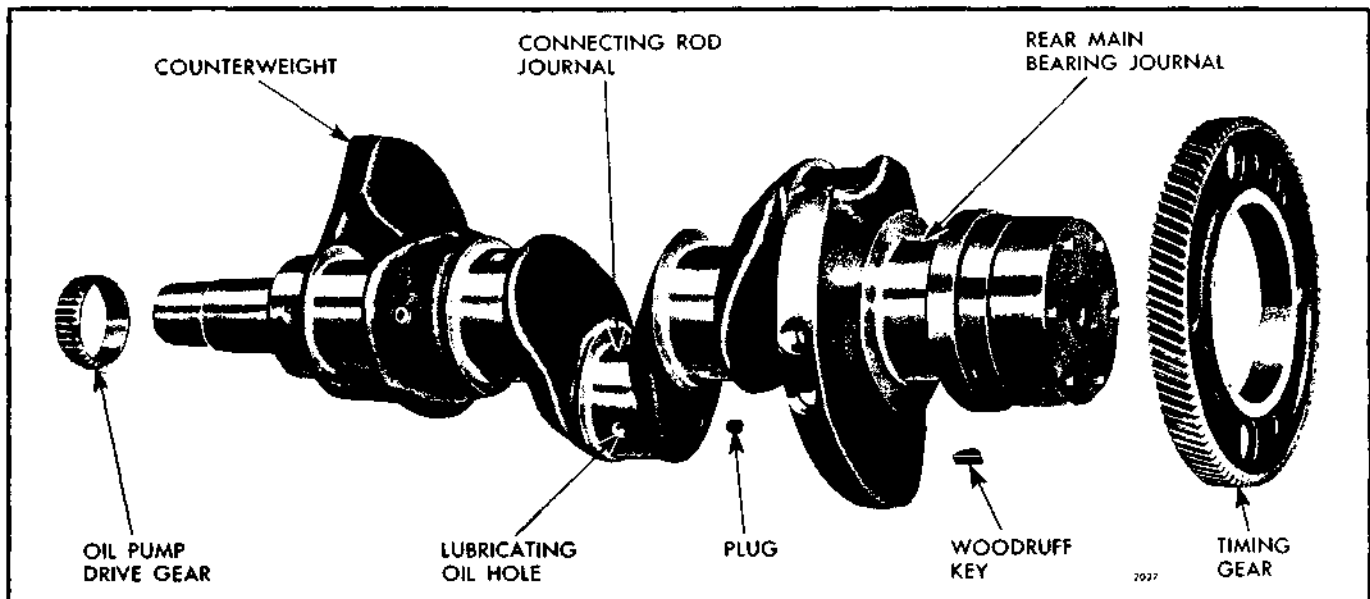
Crankshaft Details and Relative Location of Parts (Three Cylinder In-Line Engine Crankshaft Shown)
